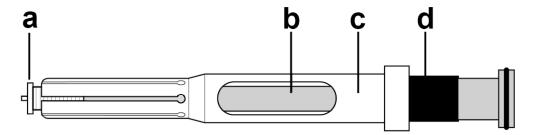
Stud chuck for PS-3A stud welding gun
